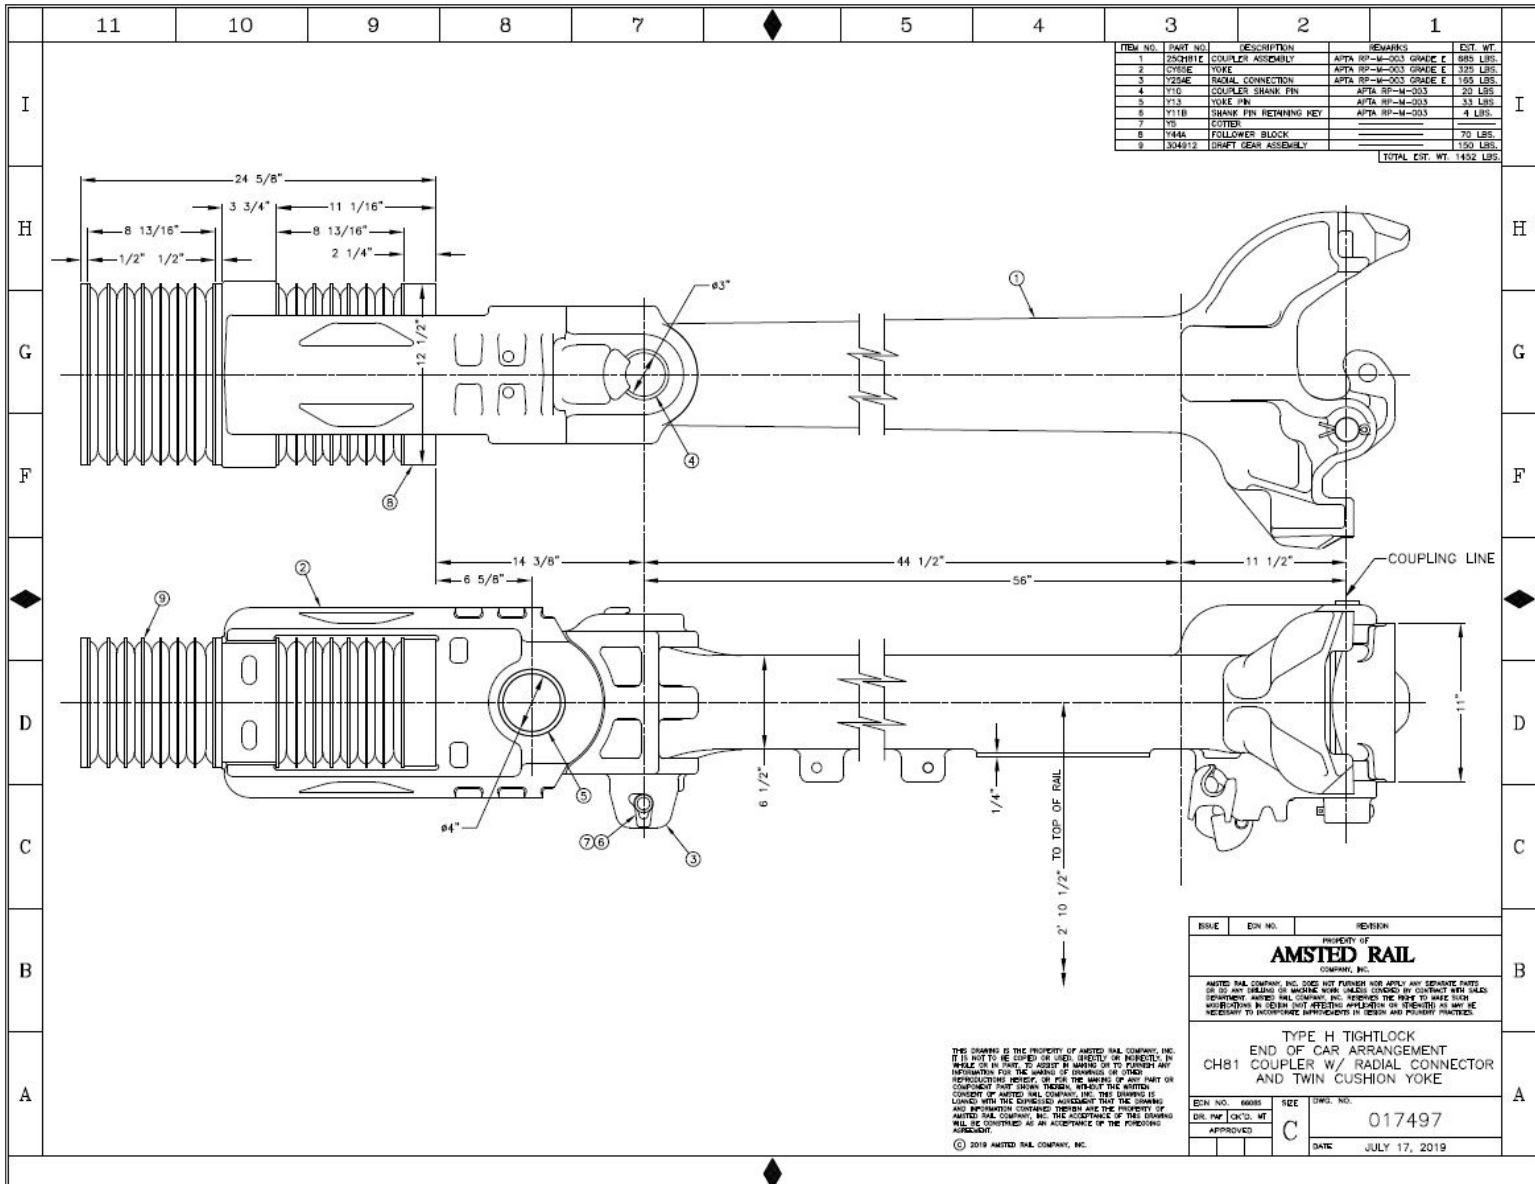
H-type Tightlock Coupler, Yoke, and Draft Gear
